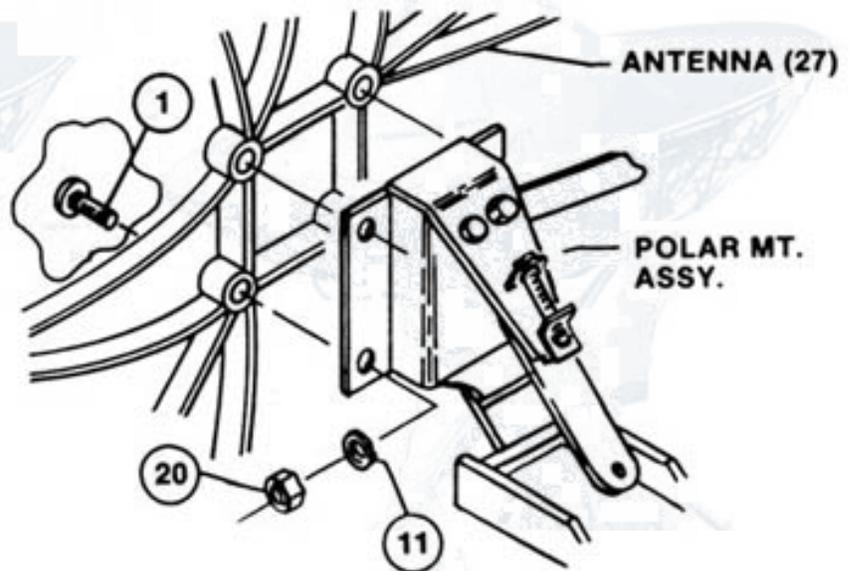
ASSEMBLING ANTENNE TO POLAR MOUNT ASSEMBLY
